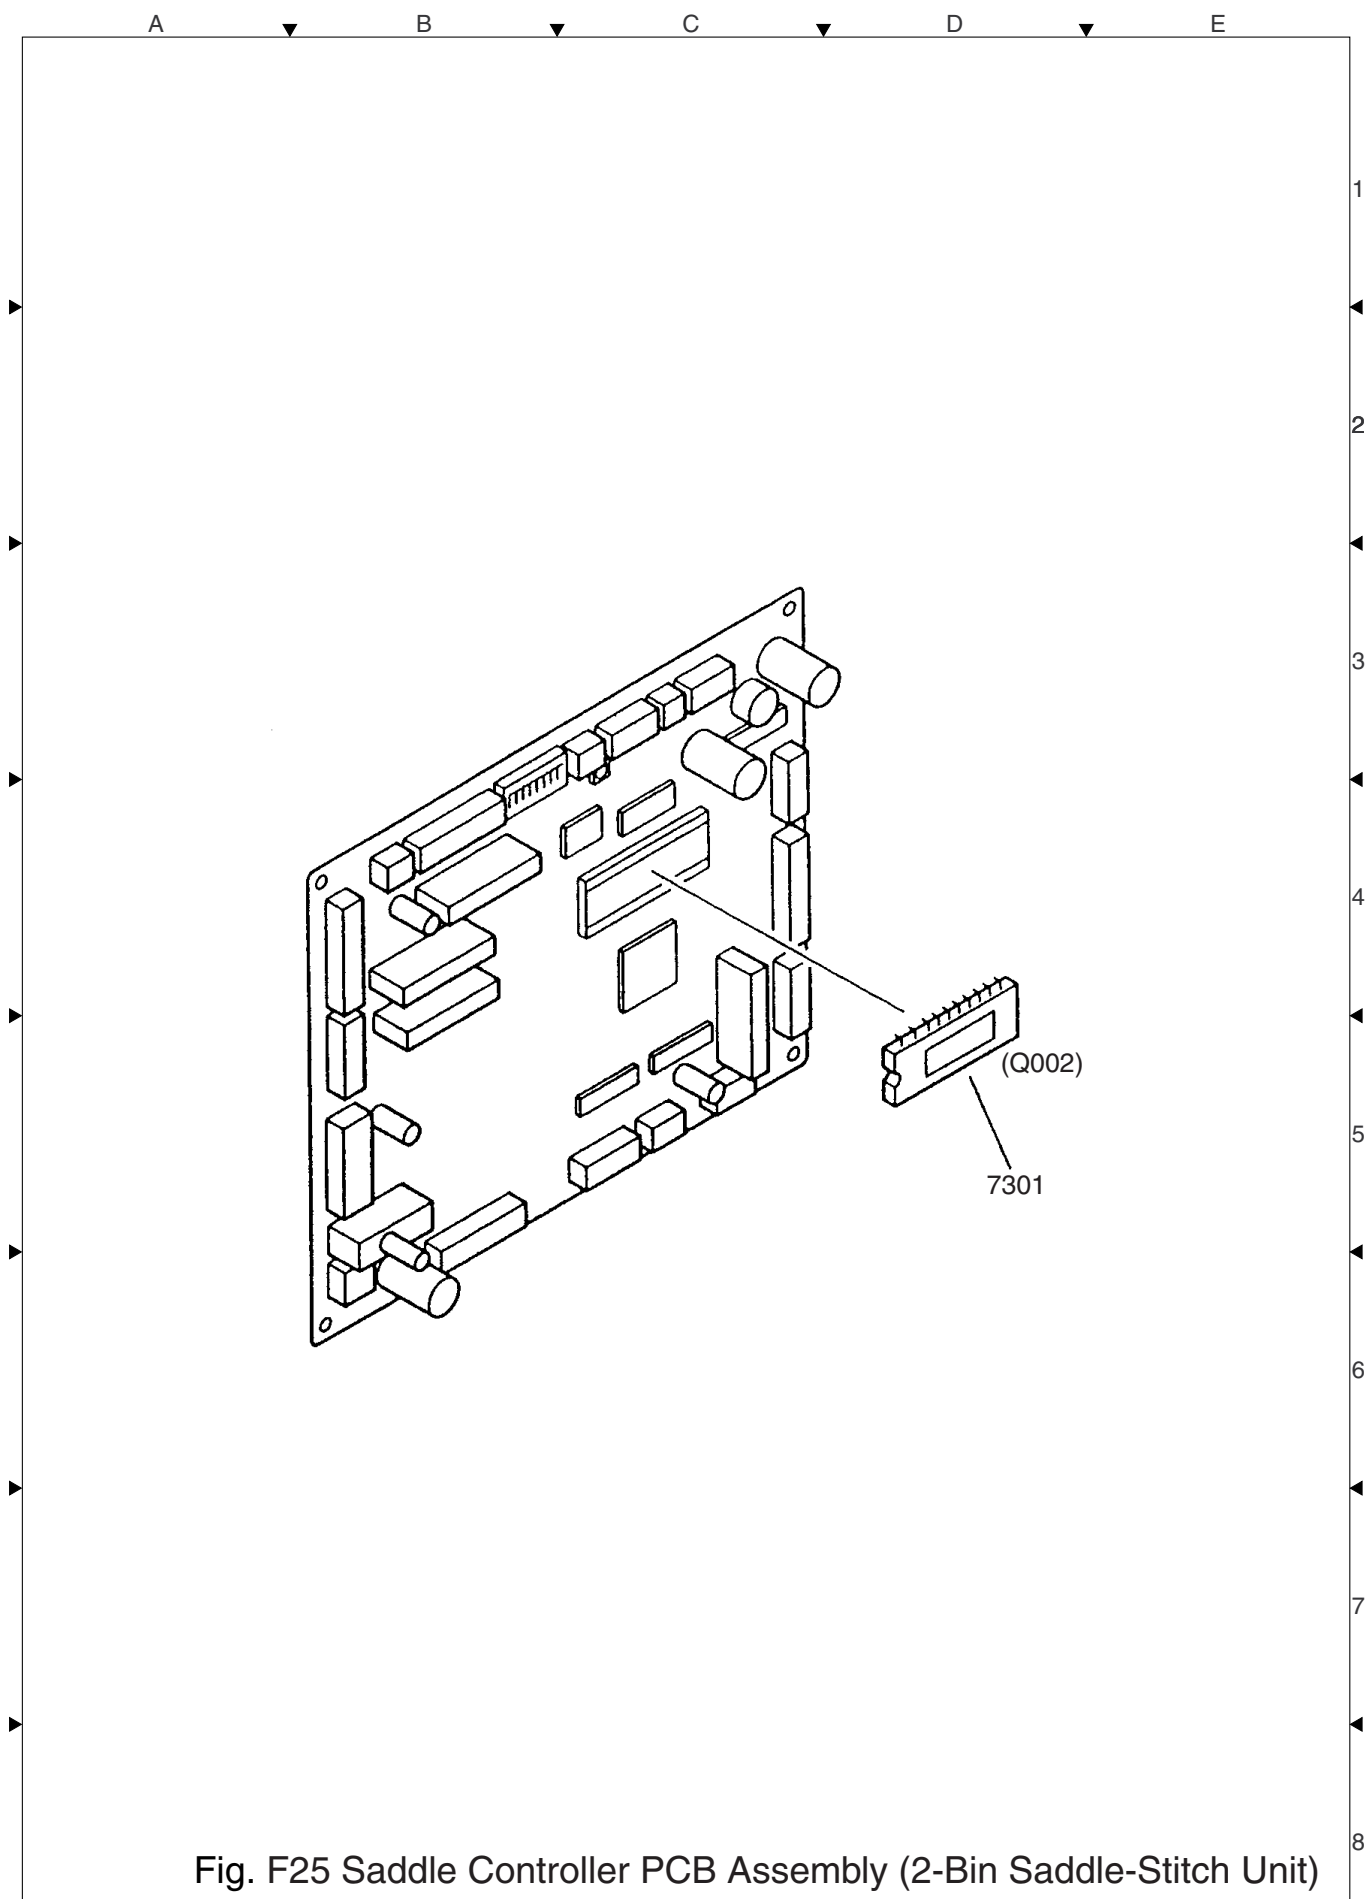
Saddle Controller PCB Assembly (2-Bin Saddle-Stitch Unit)
